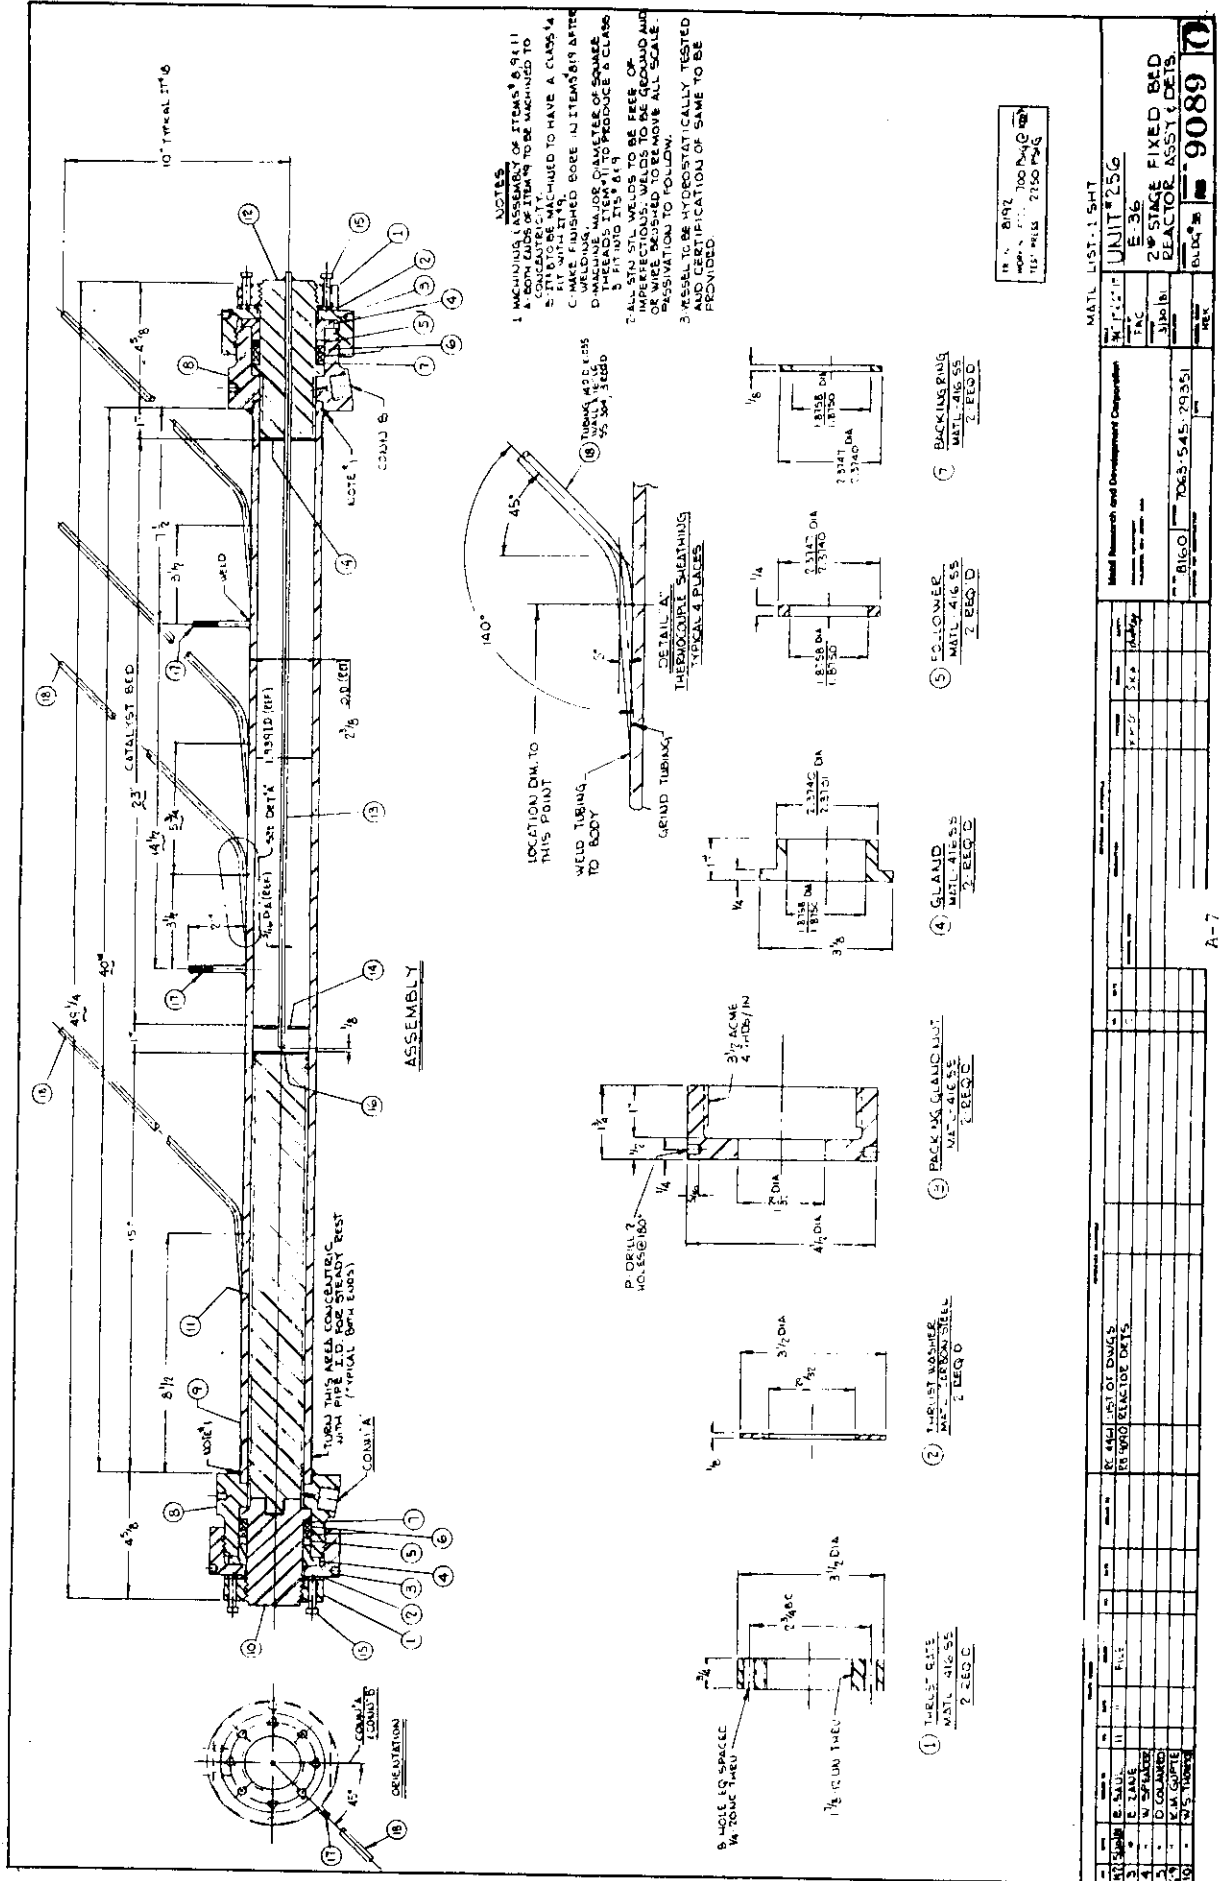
SECOND-STAGE FIXED-BED REACTOR ASSEMBLY AND DETAILS
